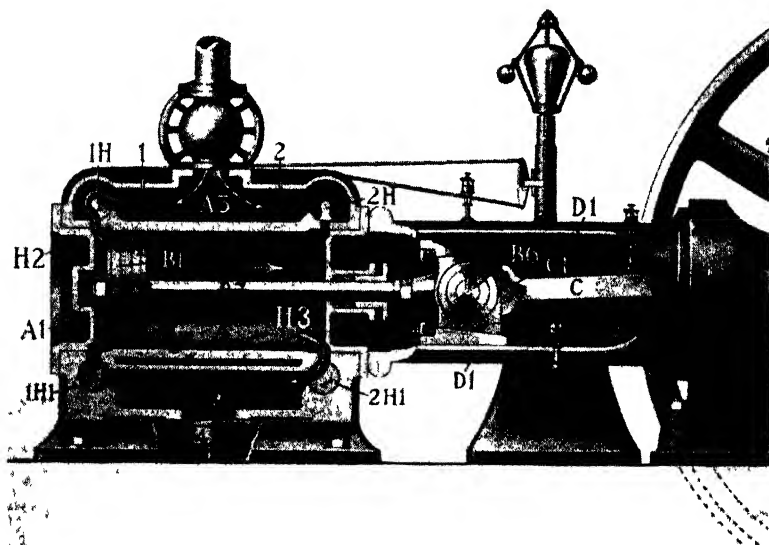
Corliss engine with cylinder and valves shown in section. (Courtesy of Vacuum Oil Co.)
